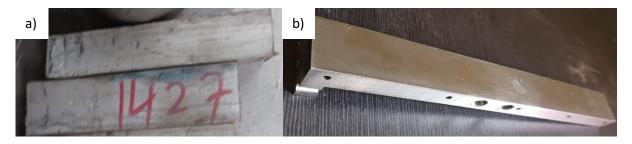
a) SS304 blocks b) SS Base plate of combustor after fabrication
